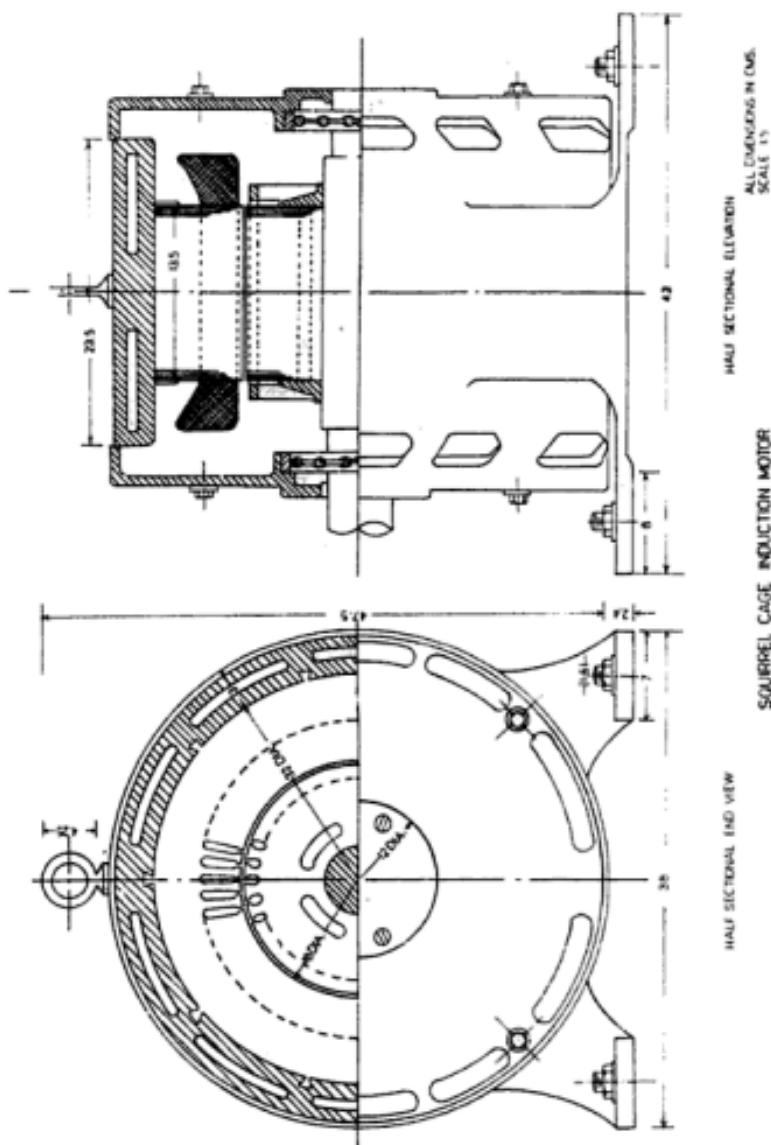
Half sectional longitudinal view and end view of a squirrel cage induction motor
